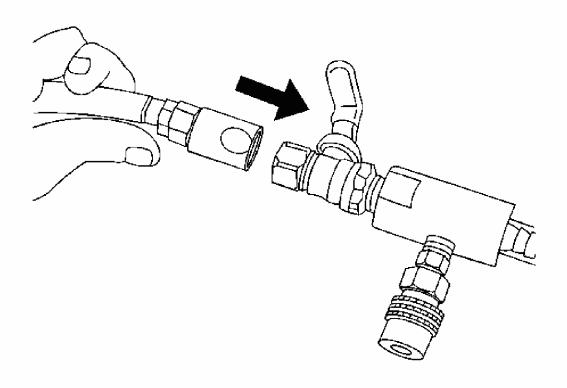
Attaching A Shop Air Hose To The Venturi Assembly Courtesy of GENERAL MOTORS CORP.
